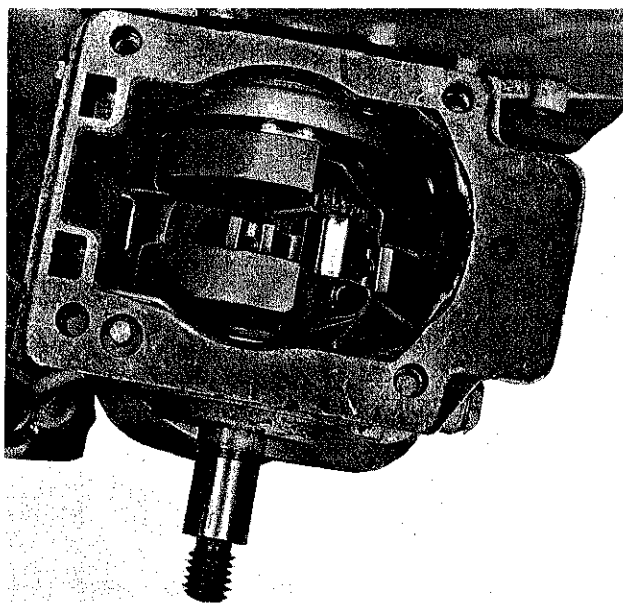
The connecting rod and piston must be pushed up as far as it will go, with the end of the rod moved to one side of the cylinder. When the crankshaft counterweights are turned away from the end of the rod, the crankshaft can be removed from the crankcase without interference with the loose end of the rod.
